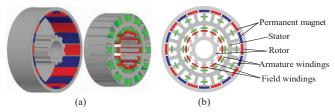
Structure of the proposed DR-PHEM. (a) Exploded view.(b) Front view TABLE I
